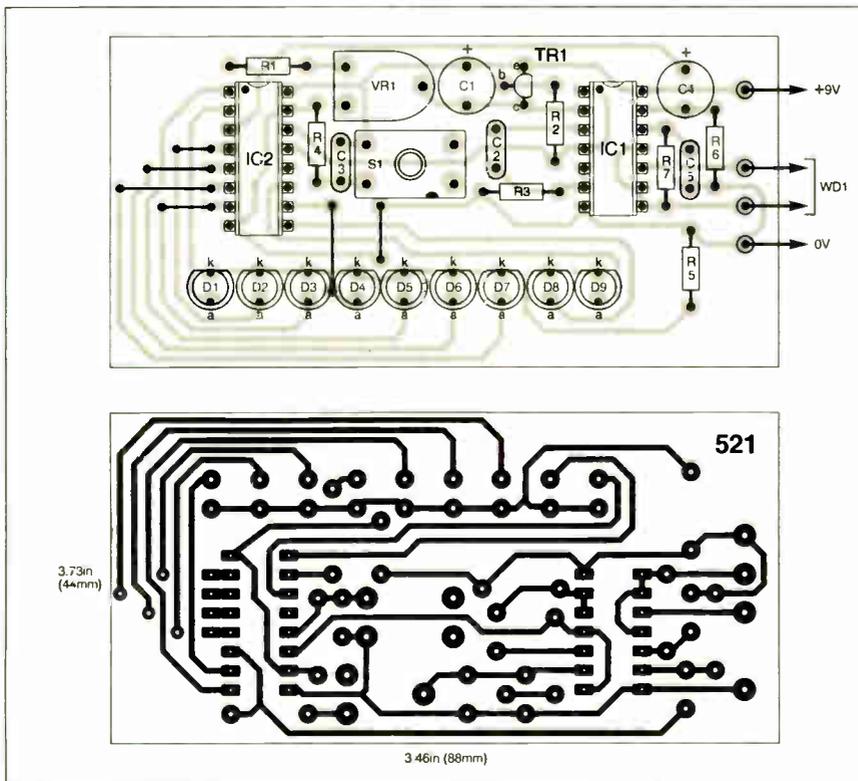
Kitchen Timer printed circuit board component layout, wiring details and full-size underside copper foil track master
